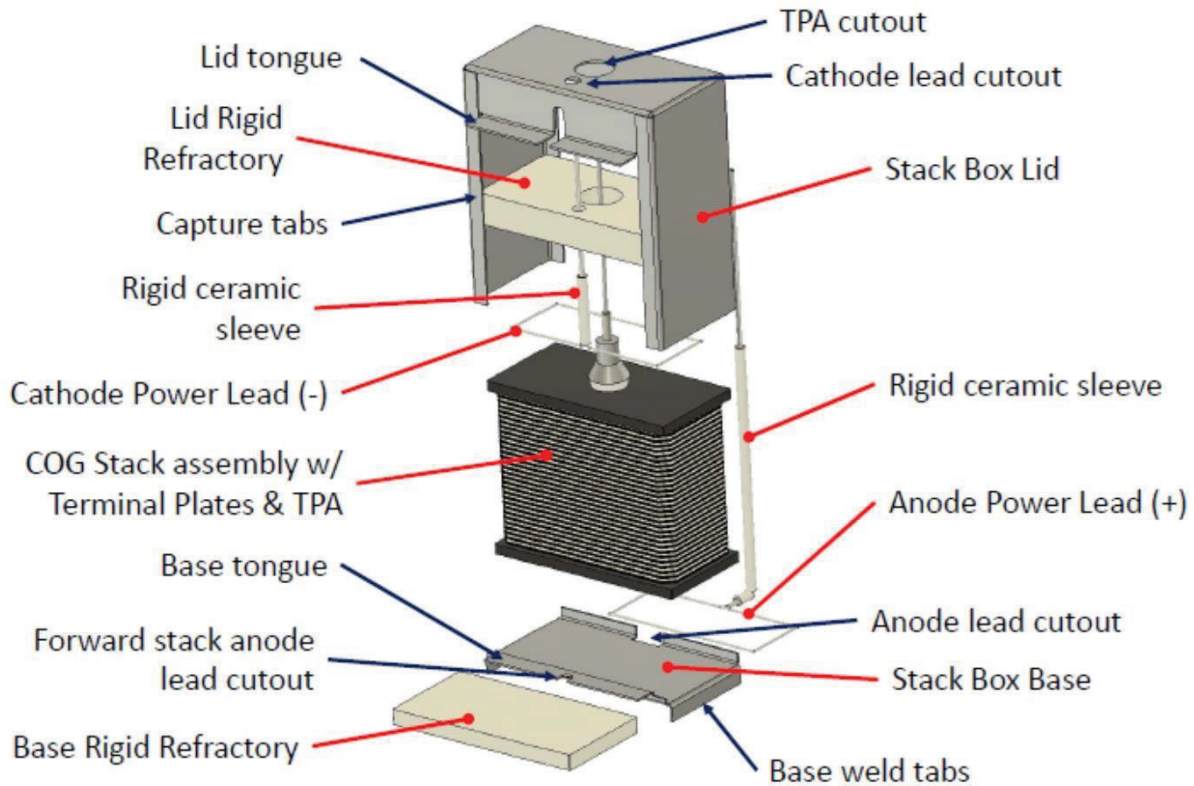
Configuration of M-COG Boxed Stack in Exploded View
